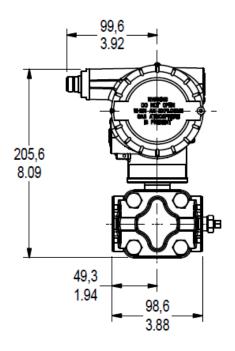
Dual Head Gauge, typical mounting dimensions for STGW740, STGW770 (remote antenna adaptor shown, rear view)
